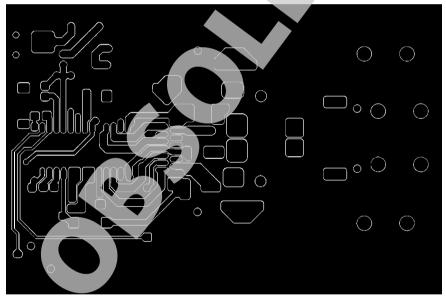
Reference PCB Silk Screen and Solder Mask Layers
